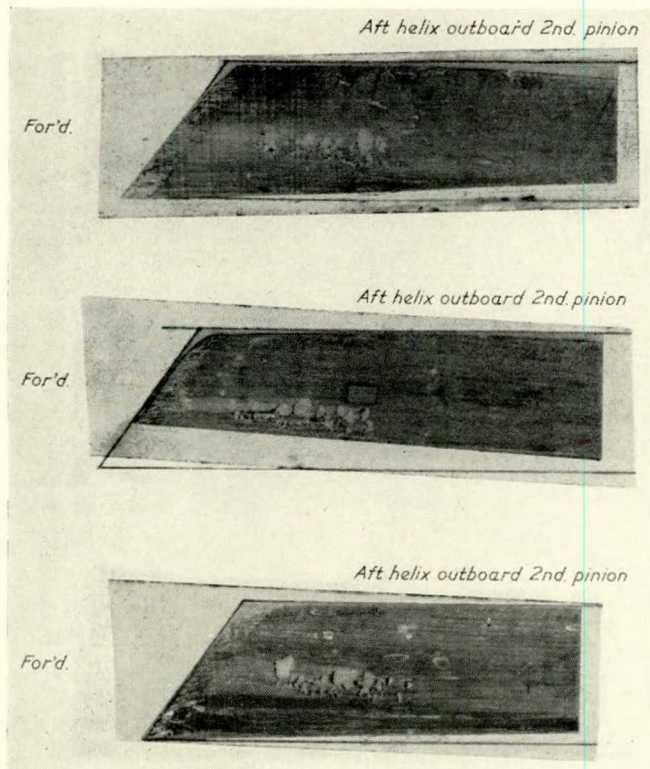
H.M.S. *Torquay* (Y.100 gears)—Selotape records showing pitting of secondary gears after 1 hour at full power
